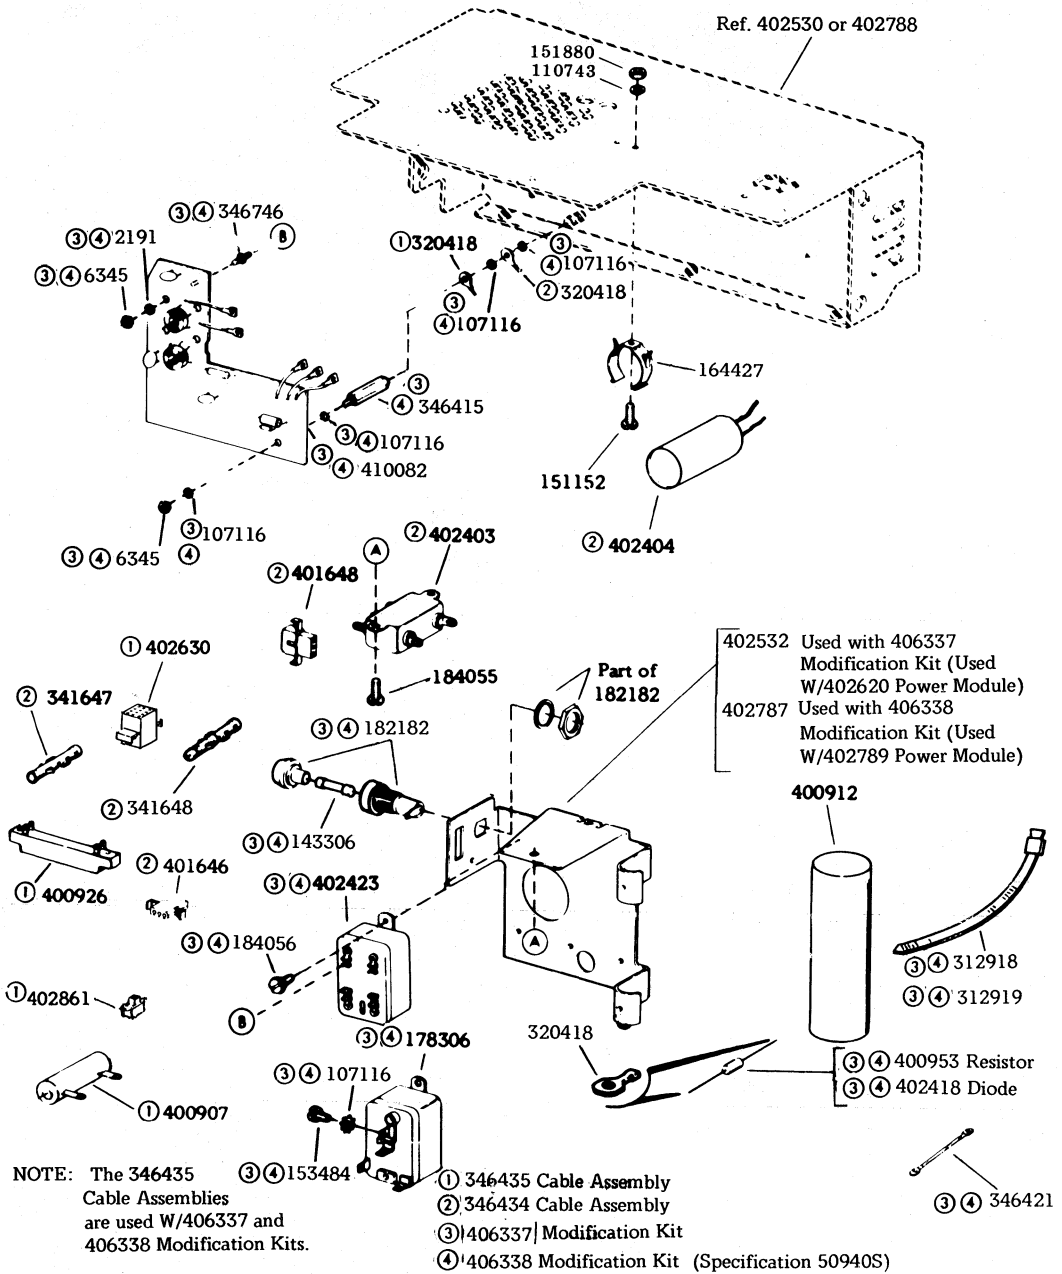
402620 and 402789 Power Module Assemblies (Late Design) (Tractor Feed - 80-Column) (Cont.)
